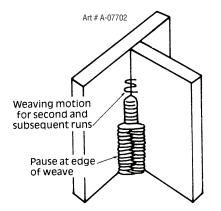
Multi Run Vertical Fillet Weld
